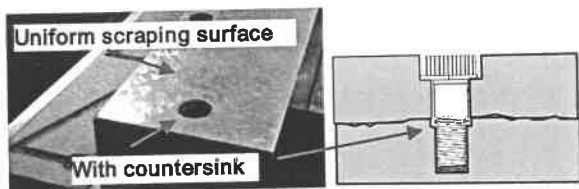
Rebuild the scraping surface and the countersink to get a stiffer joint.
